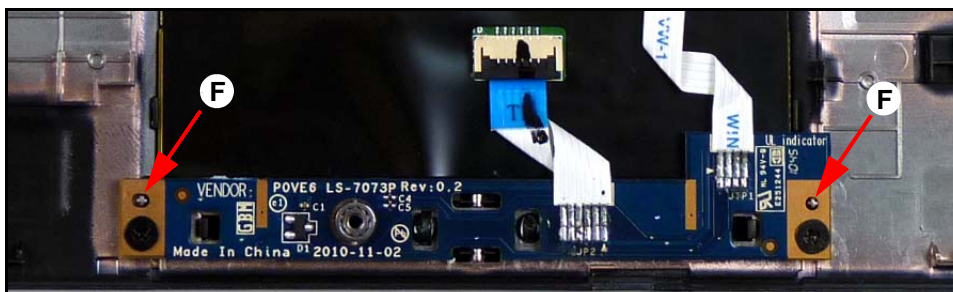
Upper Cover with Touchpad Board and FFC
